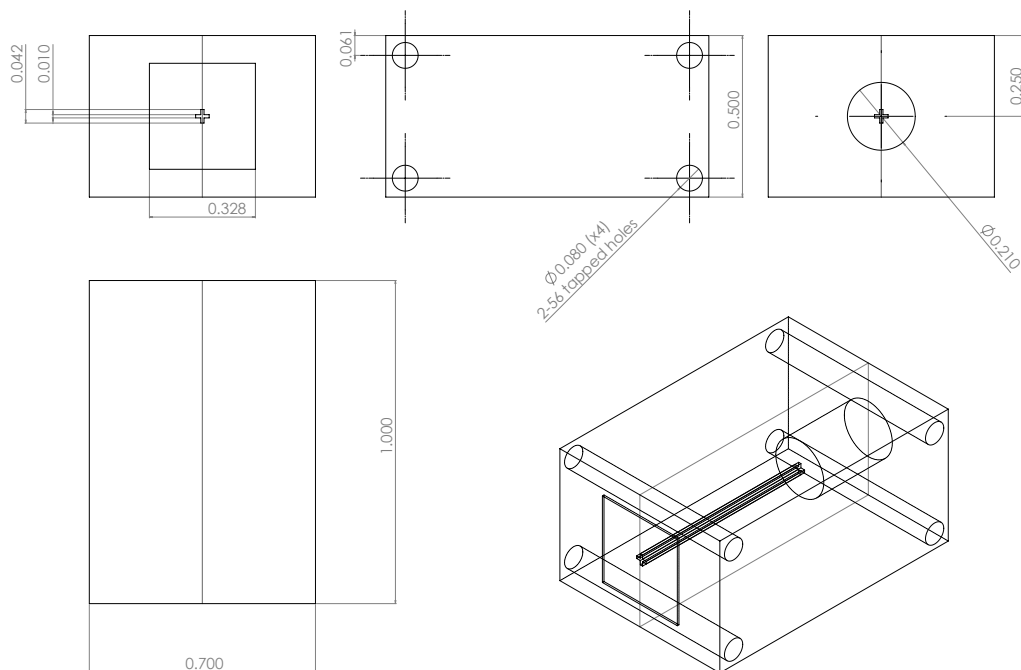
SolidWorks drawing for the Teflon aligning and levelling device.
